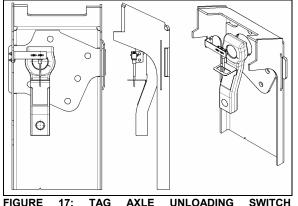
TAG AXLE UNLOADING SWITCH ADJUSTMENT 14061
